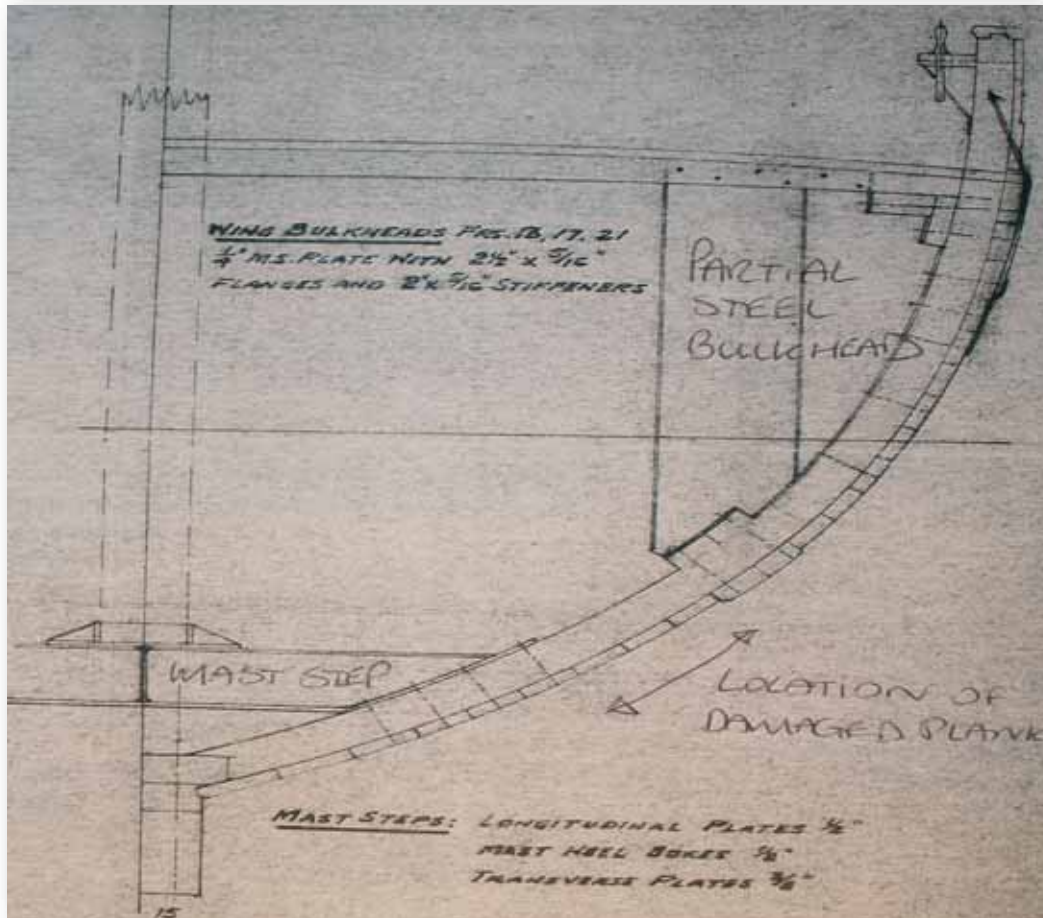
Construction Section in way of foremast (the heavier bilge plank is shown)
